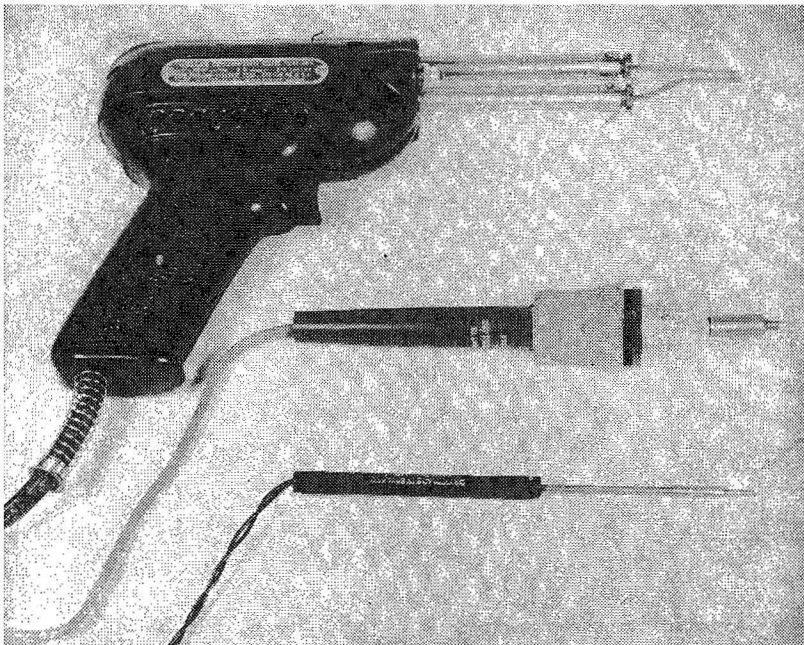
A small soldering instrument is needed for working on the miniaturized circuits in which transistors are used. A soldering gun is satisfactory, as is a "pencil" type iron or a miniature soldering tool.
